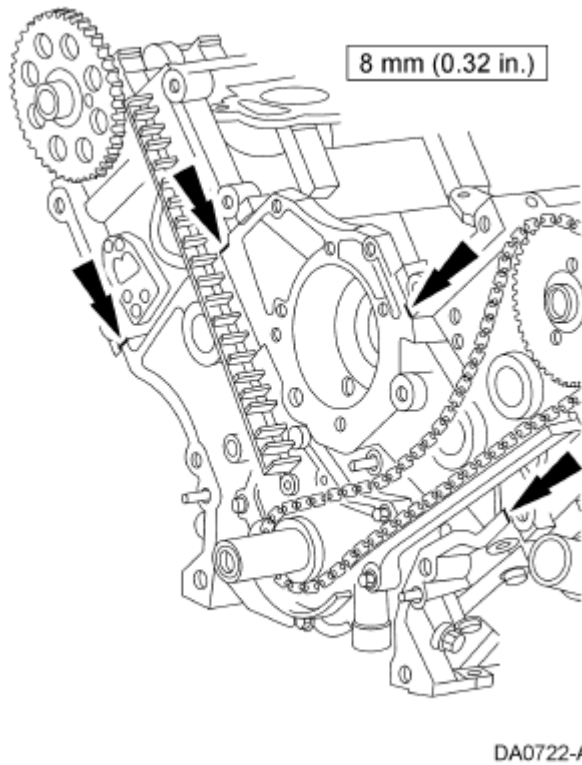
Locating Sealant Bead Applying Location On Head To Block Surface With Specifications
